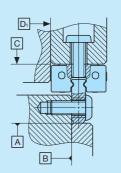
Reference mounting surface of LWL1···Y and typical mounting structure ②
